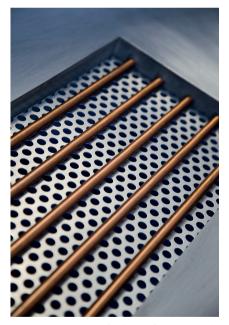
Cross-section of a thermoforming mold made from Mould D: the copper pipes provide temperature control and the perforated aluminum sheet is used to reinforce the mold © Alwa
